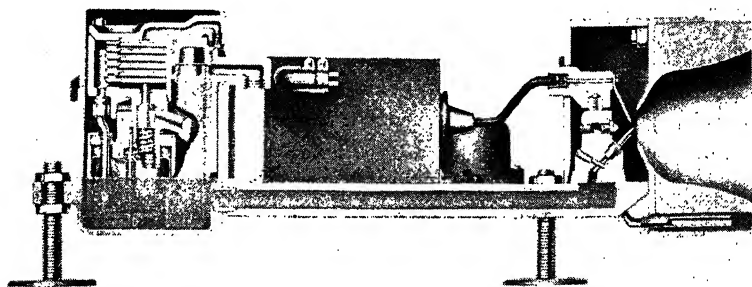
Aspirating or vacuum-pressure burner. (Courtesy of Calor Oil Burner Corporation.)
